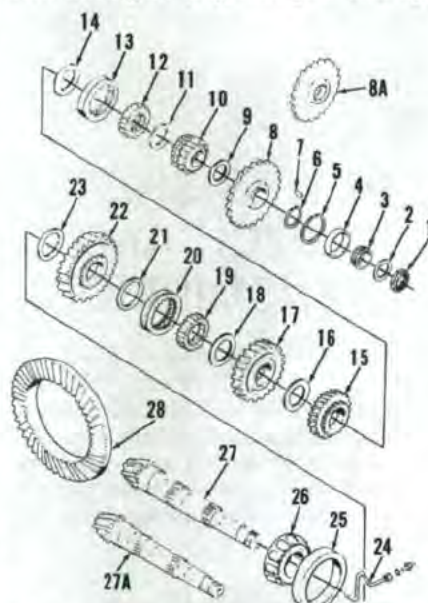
Exploded view of four-speed gear countershaft used on all Model 2090 and 2290 tractors.
